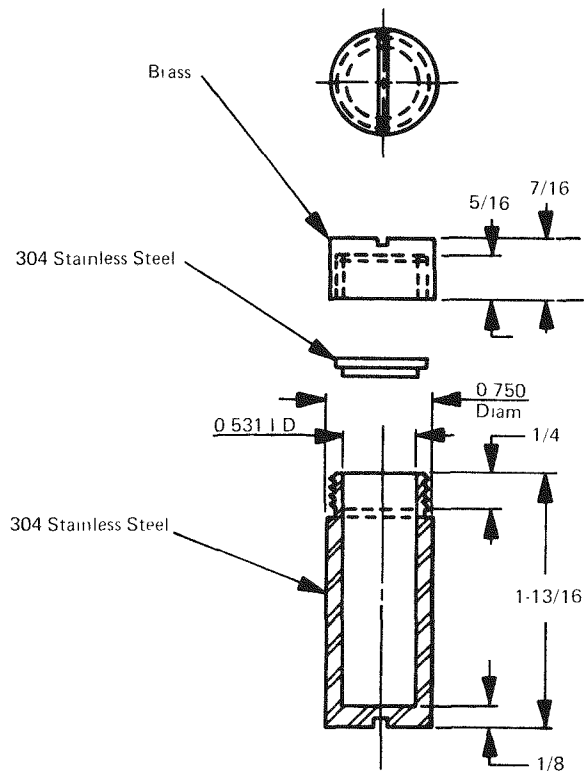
Plutonium inner capsule (dimensions in in.).
